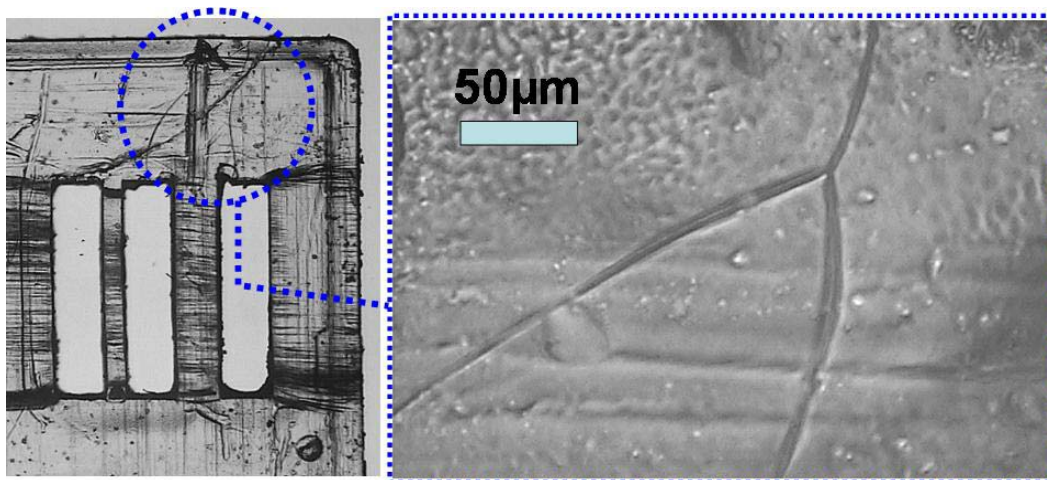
Optical image of weld lines in area 3 of the micro moulded part.
